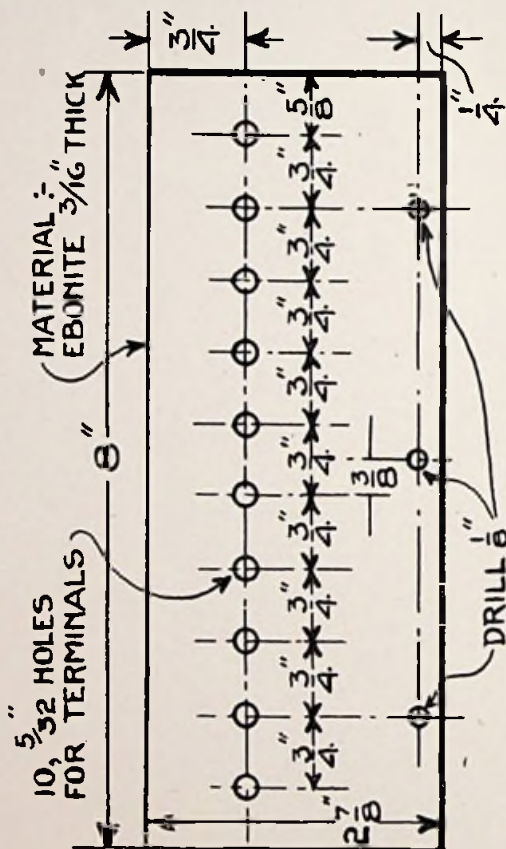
Layout of Terminal Strip of Seven-valve Super-het
